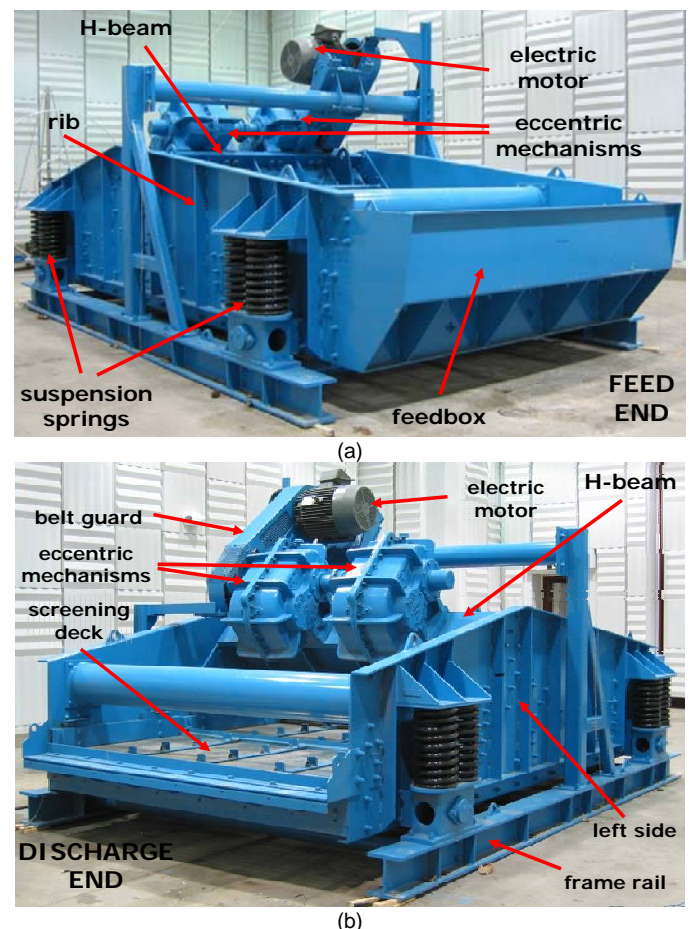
A horizontal vibrating screen used to process coal viewed from (a) feed end and (b) discharge end.
